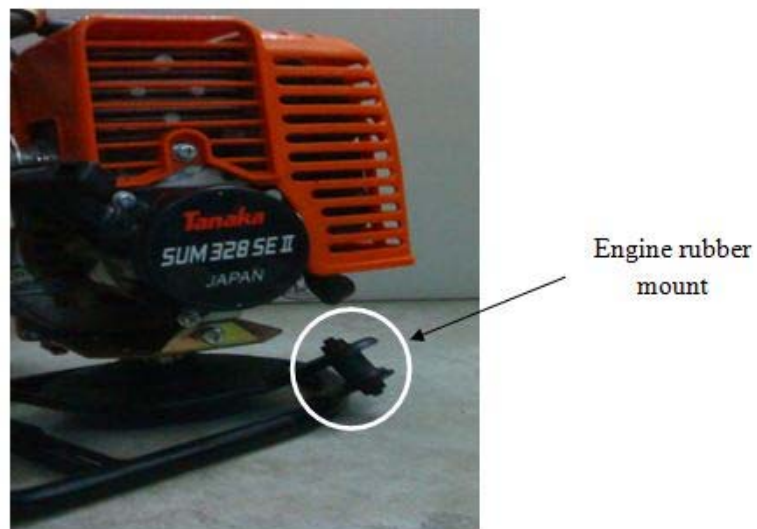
Mounting of engine rubber mount on grass trimmer
